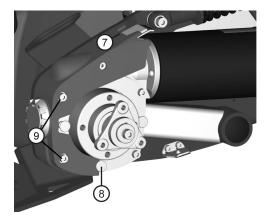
The drive gear cover is assembled with one hook and loop fastener at the top (7) and a fixing point at the bottom (8).
